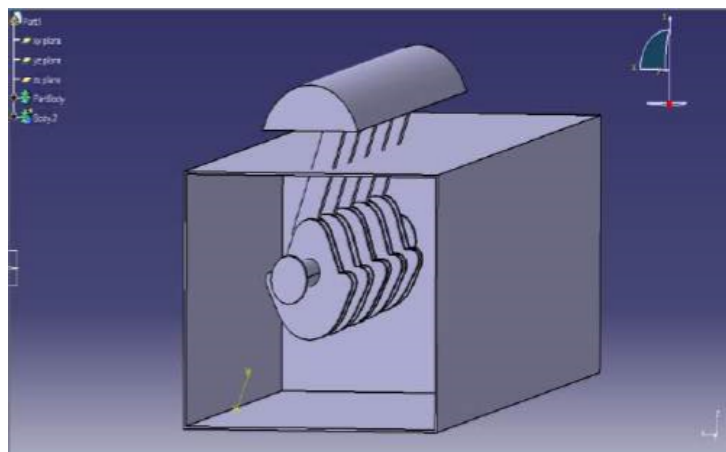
Crankshaft Mechanism working assembly in CATIA model
